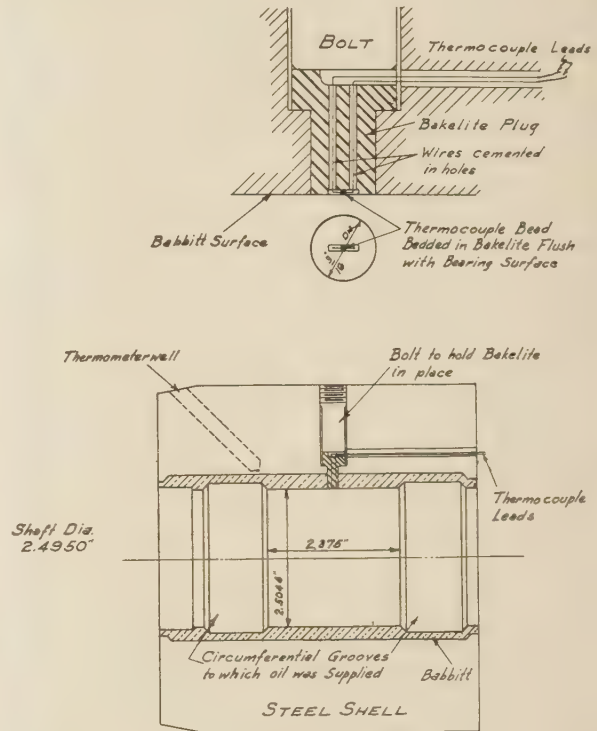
SCHEMATIC DIAGRAM OF TEST BEARING
